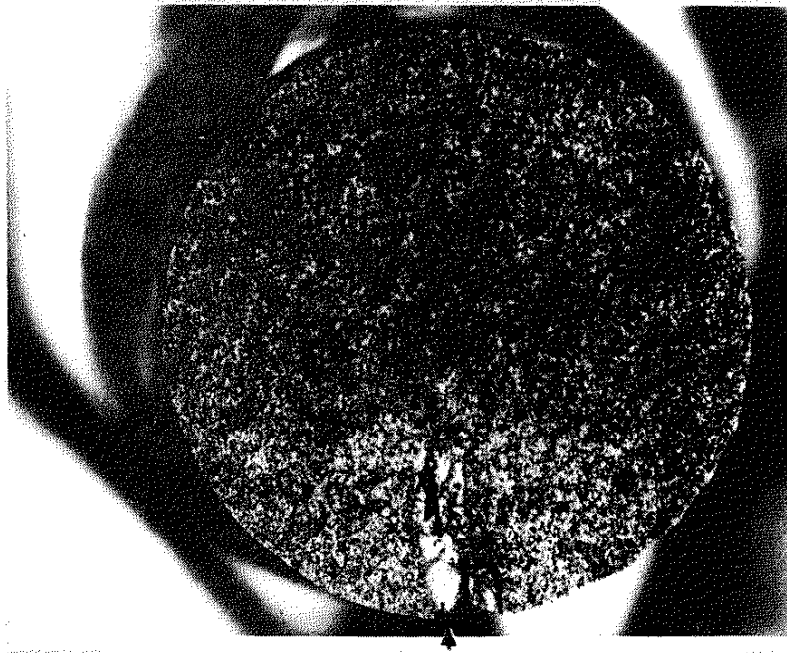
Macrograph of a gray cast iron (G-EC-25) fracture surface that initiated at a type II flaw. 8X.
